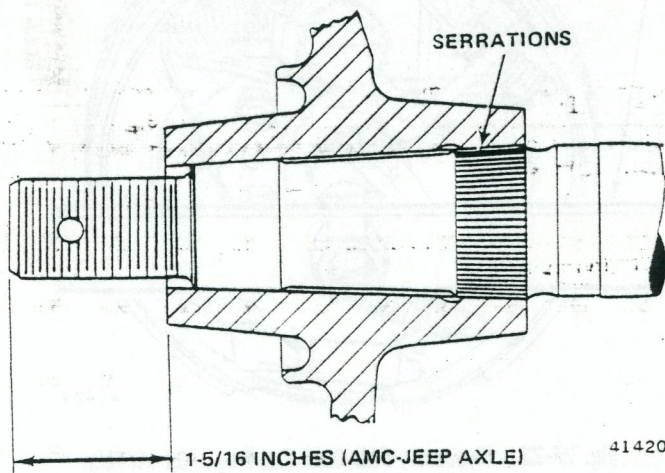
F-19 Replacement Hub Installation Measurement—CJ Axle
